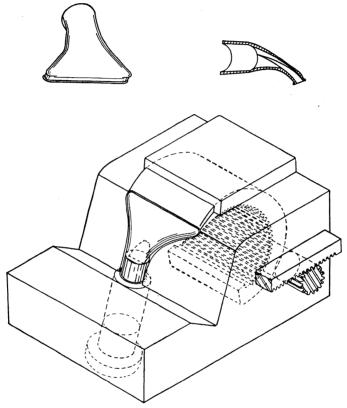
Another type of movable core is the rotary type. This unit, which is used to cast the nozzle for a household vacuum cleaner, is used because the hole in the part is cored on an arc.
